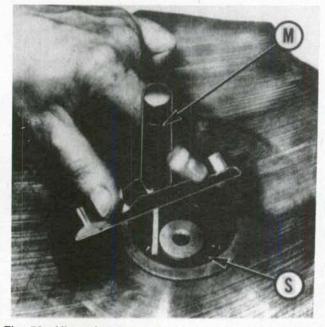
View showing measurement from rear face of housing to shoulder of output shaft (S) to determine shim thickness for correct output shaft end play.
